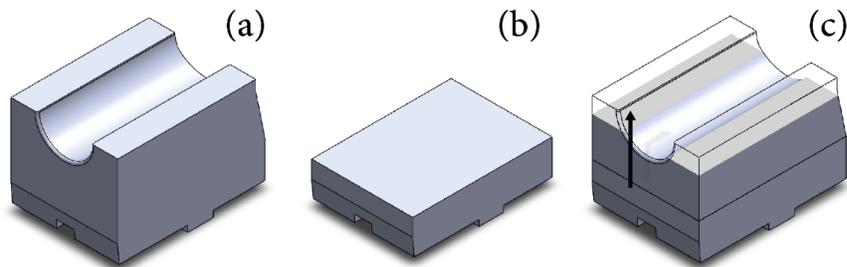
Production method for hybrid clamping dies: a) hybrid clamping dies made up of a bottom support and a top personalized part; b) bottom support machined by CNC milling; c) top personalized part manufactured by SLM directly on top of the support
